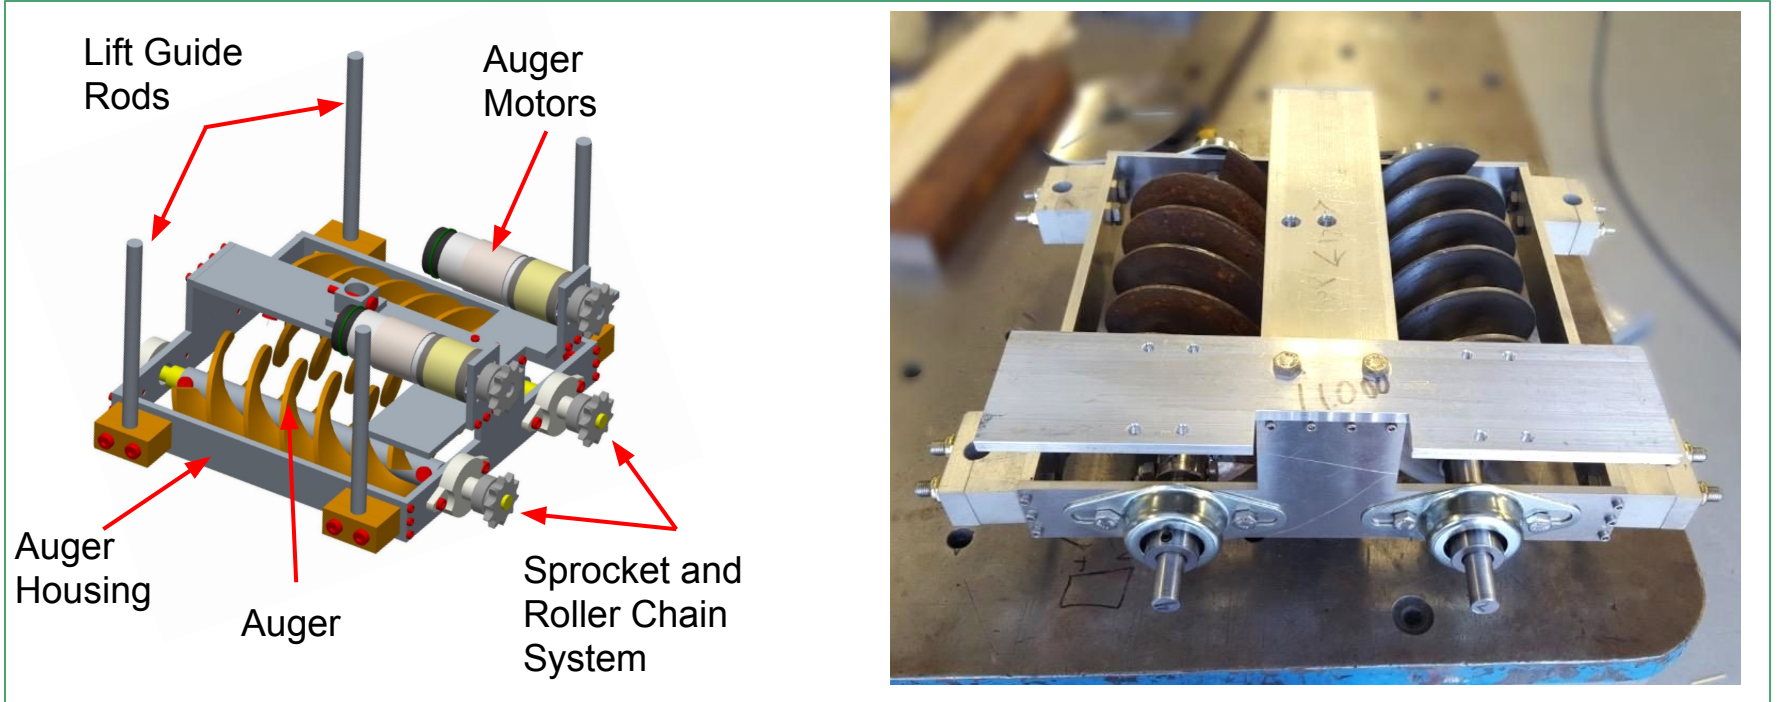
Auger Housing Assembly with Augers; CAD to Actual Component.
